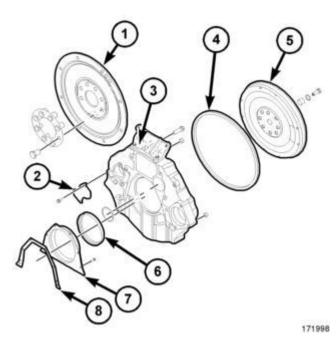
Flywheel Housing, Adapter Plates & Rear Oil Seal Courtesy of CHRYSLER GROUP, LLC
